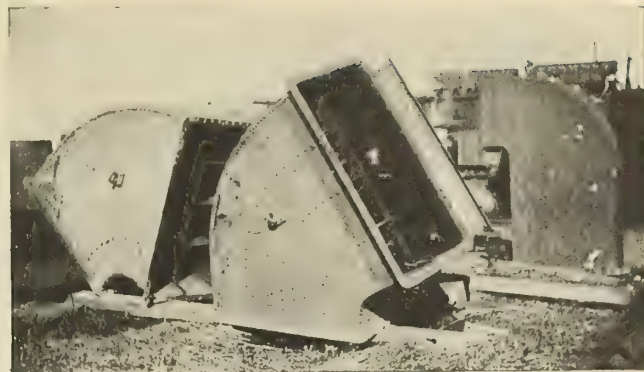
Exhaust Pipes with Perforated Plates for Internal Bracing
